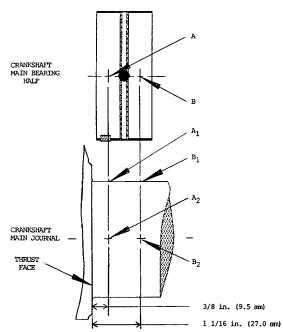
Clearance Measuring Points for Crankshaft Main Bearings
